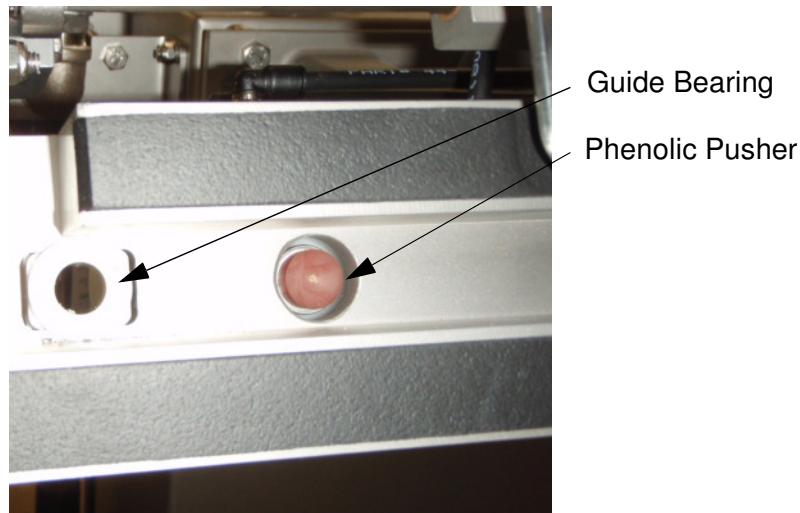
Pancake Cylinder Pusher (Heat Bar removed)
